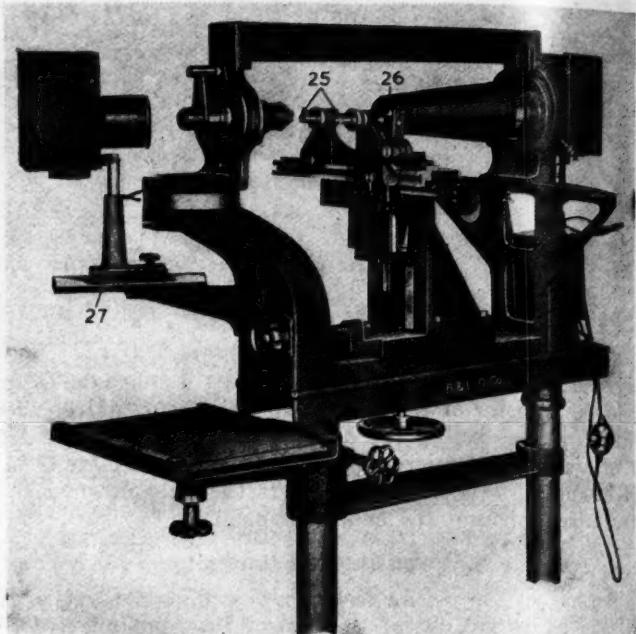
Universal screw holder which supports screw on standard pitch blades
